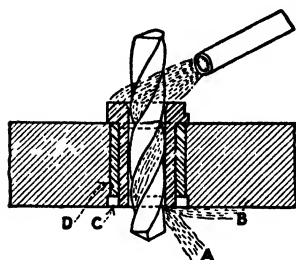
Keeping a drill cooler by a recess at bottom.
